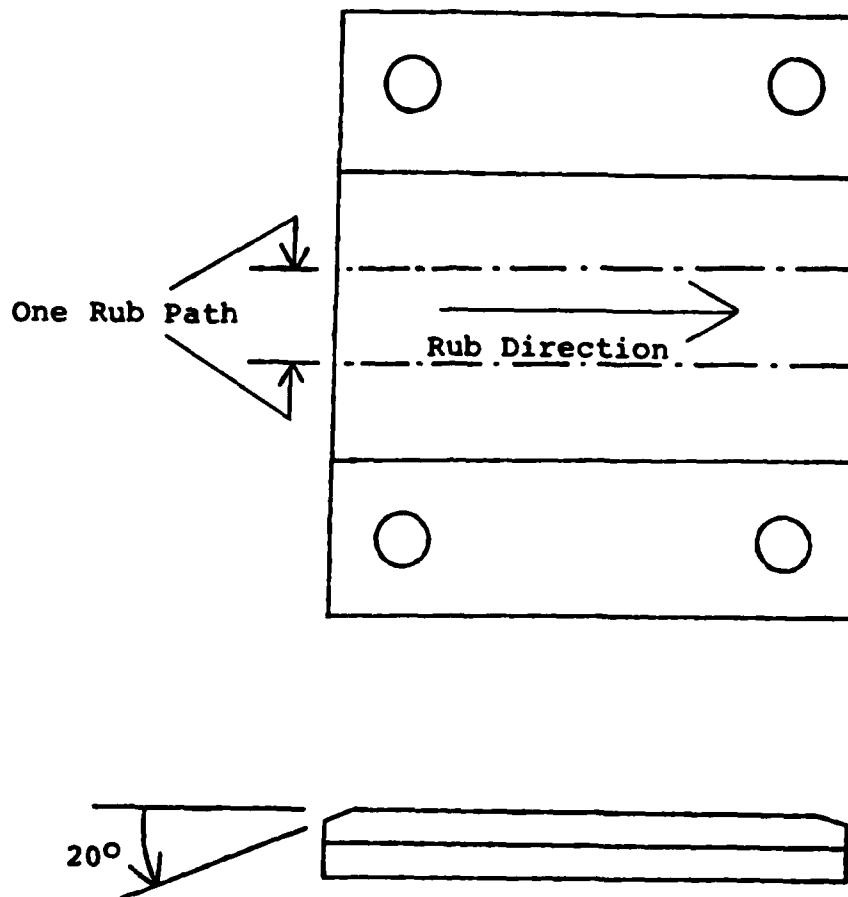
Typical seal specimen used during rub testing. Rub path shown is center path of three on each specimen.
